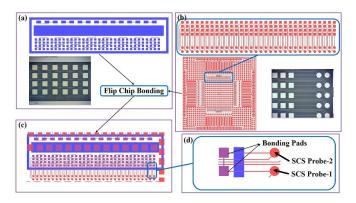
Design of the pseudo ASIC chip and the pseudo MEMS chip and two-probe measurement technique that is used for this study. (a) Design of the pseudo ASIC chip and partial view from the array of bonding pads of the pseudo ASIC chip (in the optical microscope image, each square feature is 95 μ m x 95 μ m). (b) Design of the pseudo MEMS chip, design of the bonding pads of the pseudo MEMS chip, and partial view from the array of bonding pads of the pseudo MEMS chip after the TSFCB process. (d) Two-probe resistance measurement method is used to measure the electrical resistances of the wires and two connected GSBs to confirm the electrical and mechanical connectivity between the pseudo ASIC and pseudo MEMS chips via the DCC-coined GSBs.
